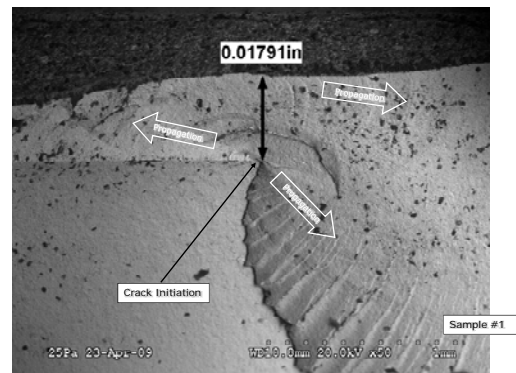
ETF40B 6th Stage Blade Fracture Surface Identifying Fracture Origin
